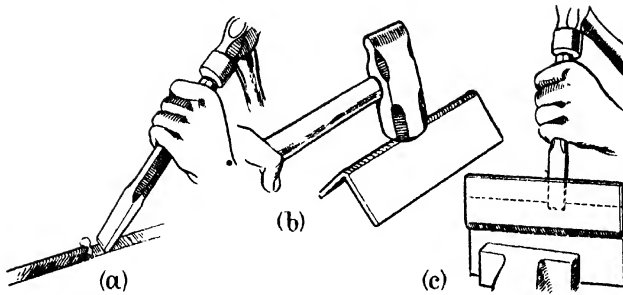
METHODS OF TESTING SPECIMEN WELDS
